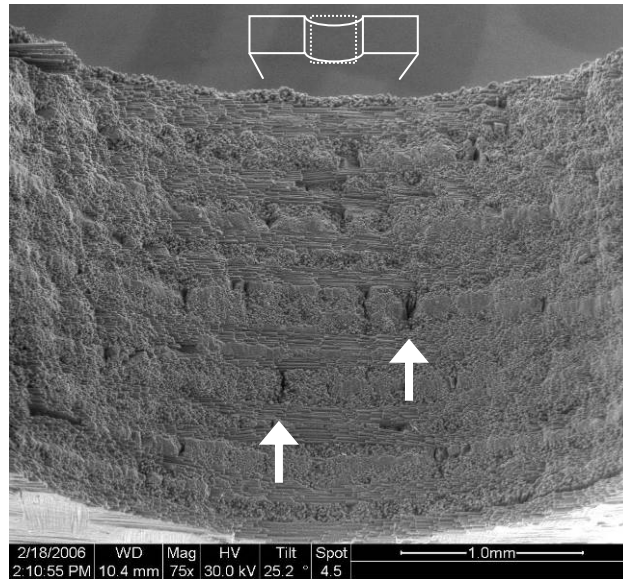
Surface condition of machined hole (inside view), visible macroporosity
